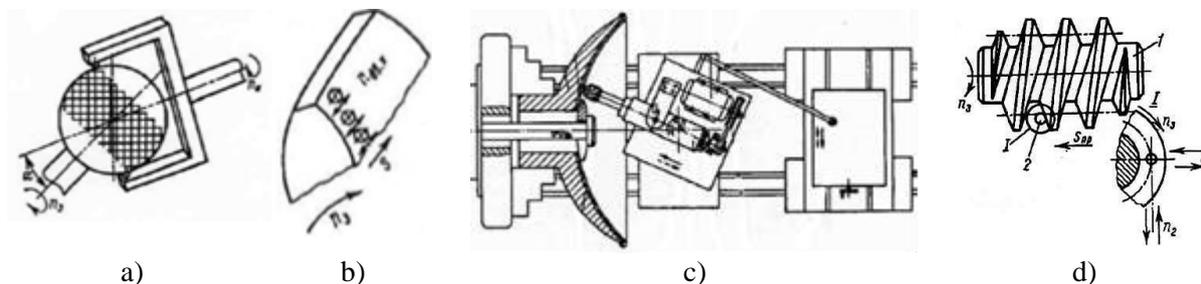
Kinematic schemes of the process VSPD [5]: a) external spherical surface ; b) involute side surface from spur gear; c) internal spherical surface ; d) helical surface from worm shaft.
